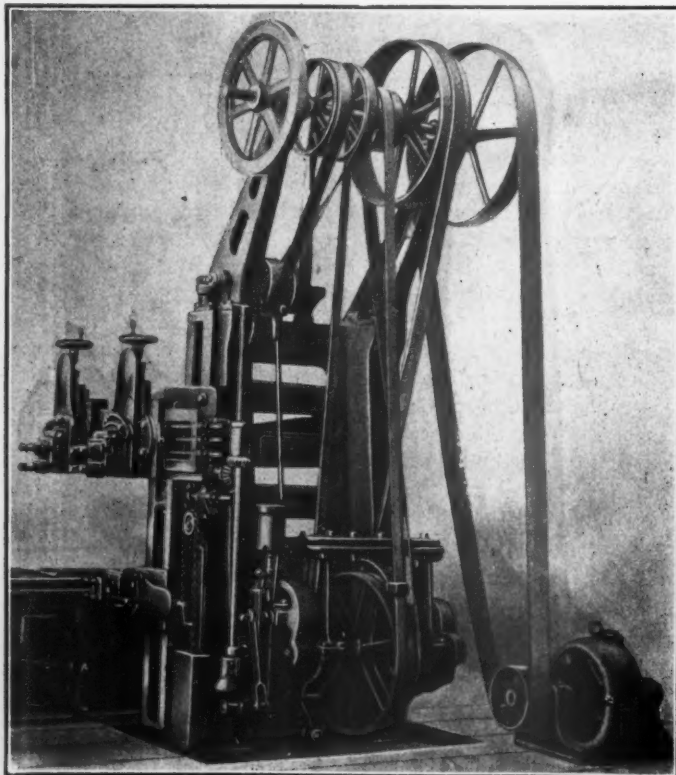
VIEW OF THE BELTED INDIVIDUAL DRIVE USED UPON LARGE SIZES OF THE OPEN-SIDE PLANERS, BUILT BY THE DETRICK & HARVEY MACHINE COMPANY, SHOWING USE OF FLYWHEEL.
